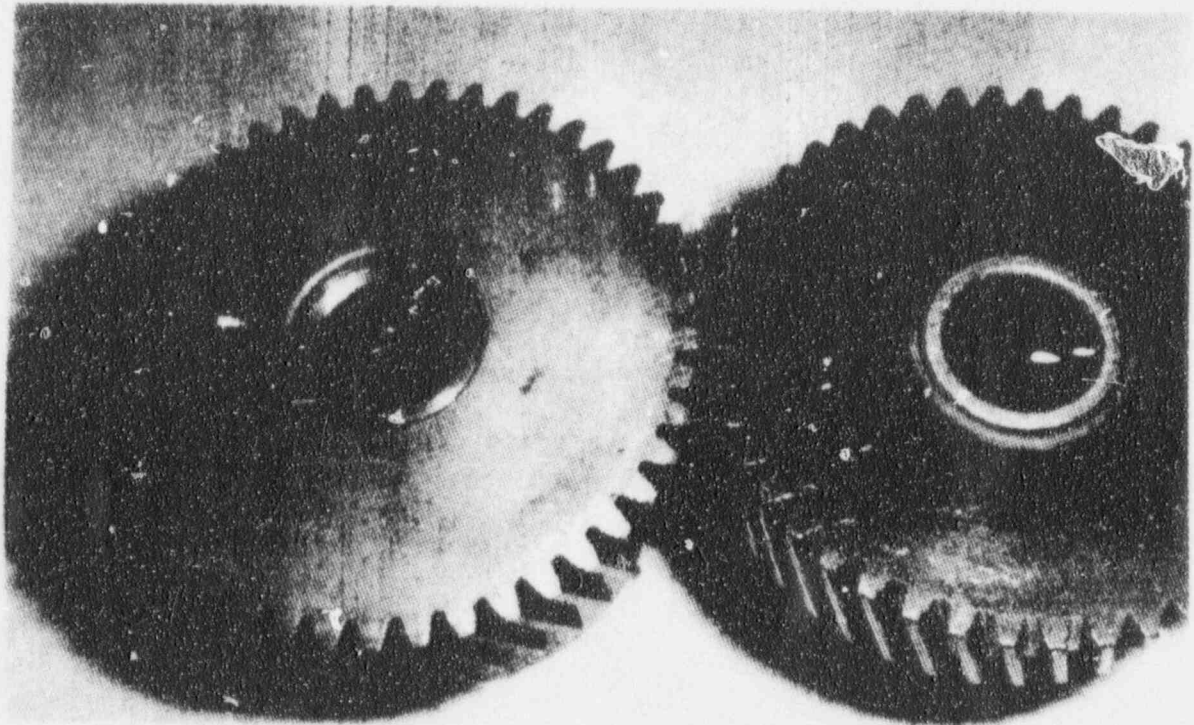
Worm Shaft Clutch Gear (Gear Tooth)
